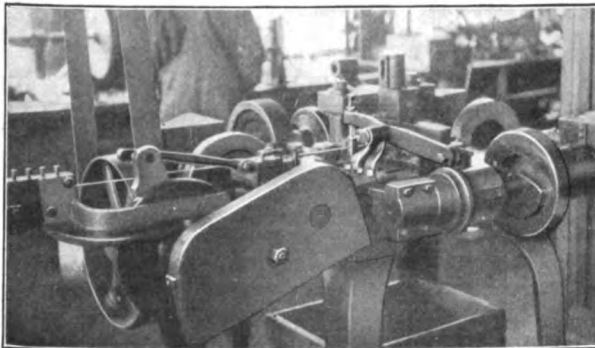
ONE OF THE WIRE-FORMING MACHINES
